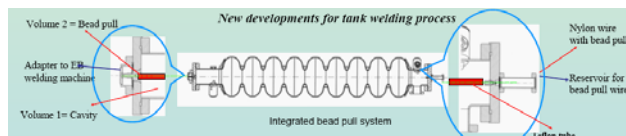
Cross section of the integrated bead-pull measurement devise for tank welding
